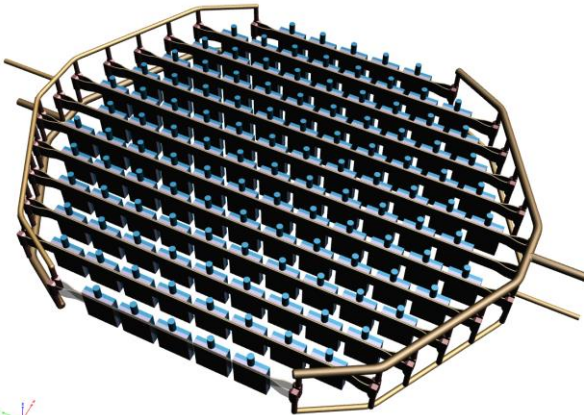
CAD drawing of the preliminary design of the MPE evaporators
